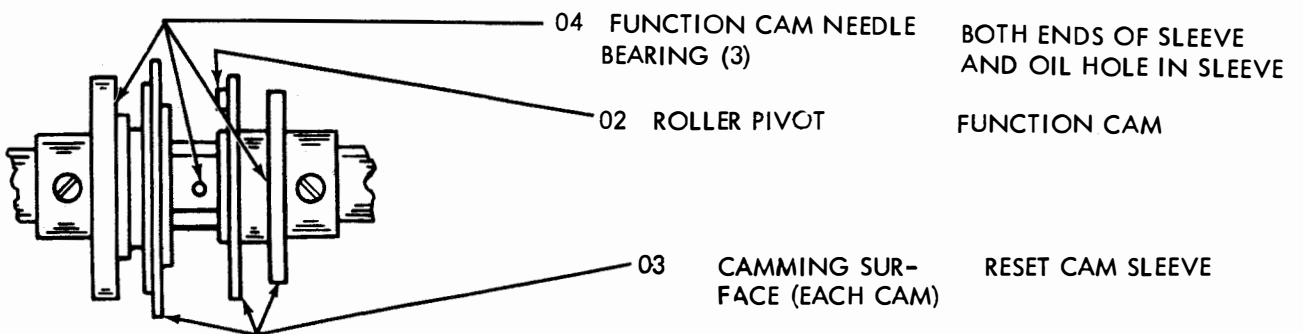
Perforator Clutch and Reset Cam Mechanism
